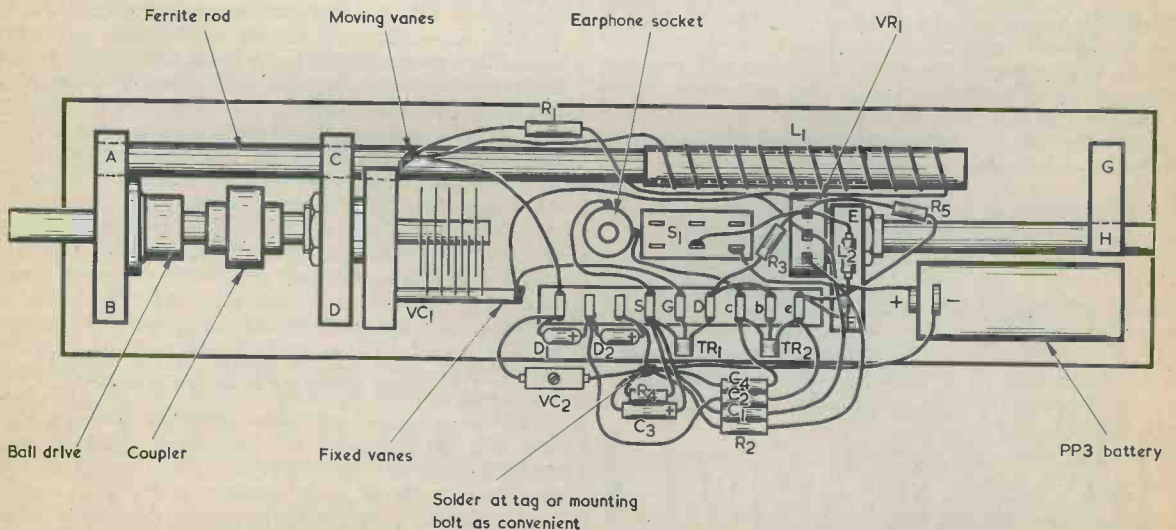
Layout and wiring diagram for the receiver. The components connecting to the tagstrip are shown spaced out for clarity; in practice they should be positioned above the tagstrip
